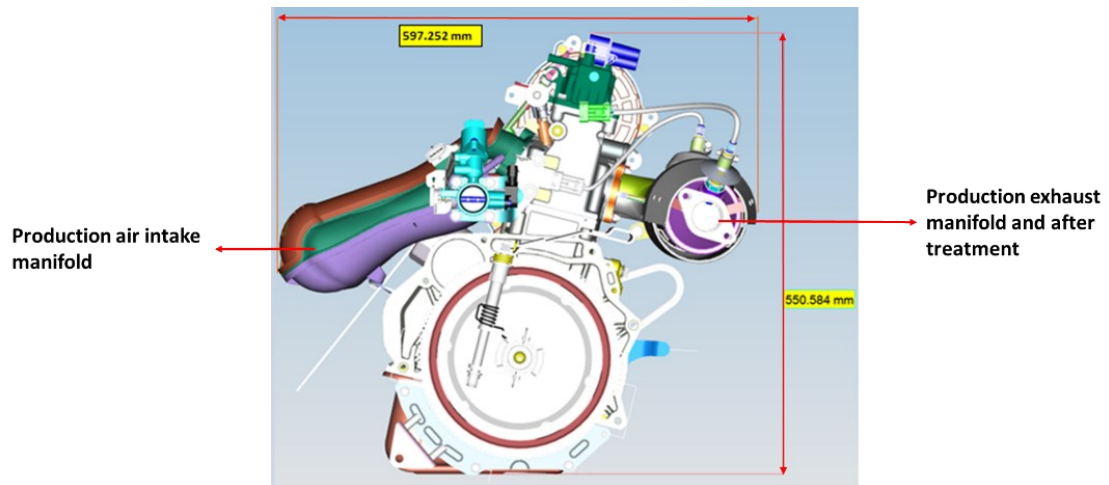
Engine overall dimensions with intake, exhaust and after-treatment, viewed from flywheel end [6]
